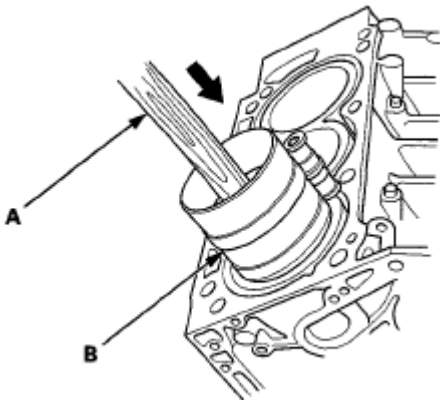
Positioning Piston/Connecting Rod Assembly In Cylinder
